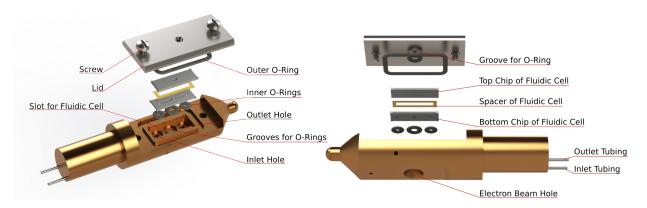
Depiction of the holder tip assembly, exploded to show each component. The inlet and outlet tubing would be longer in reality, travelling the entire length of the sample holder. The slot for the fluidic cell is sized such that the chips should fit snugly; the round "ears" extending from the corners of the slot allow space for pointed tweezers to remove the cell, as well as making the machining easier. The O-ring grooves in the slot and in the lid are designed such that the O-ring will compress primarily towards the centre of the groove; all O-rings used in the design have the same cross-section, and should therefore compress at the same rate. The electron beam holes (both in the lid and the tip) have conical profiles to allow tilting of the holder up to 20° without occluding the beam. The outer O-ring is actually round when not held in place by its groove. The small holes visible on the sides of the tip are from drilling the inlet and outlet channels, and would be filled in during manufacturing.
